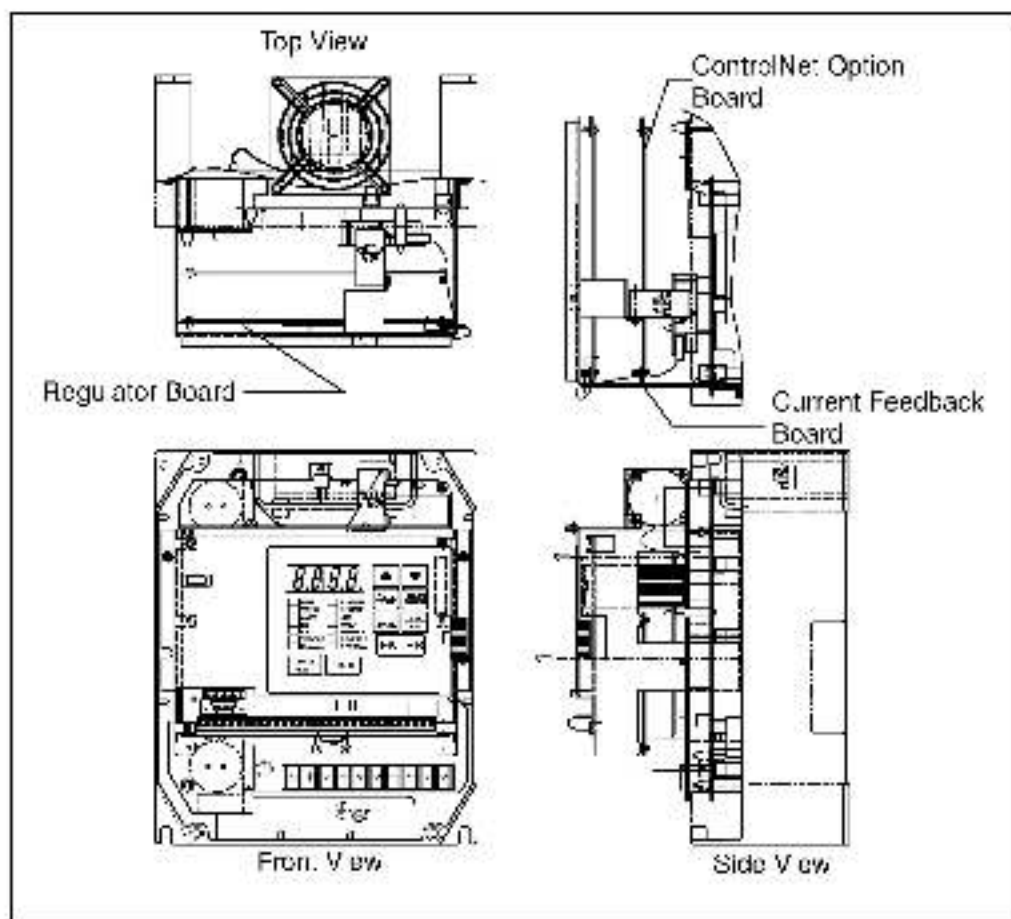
1.5 HP & 480VAC GV300/SE Drive
